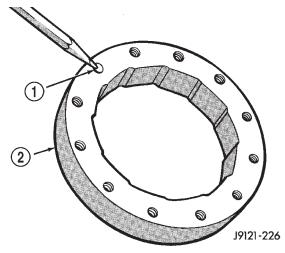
Location Of Non-Threaded Hole In Clutch Cam
